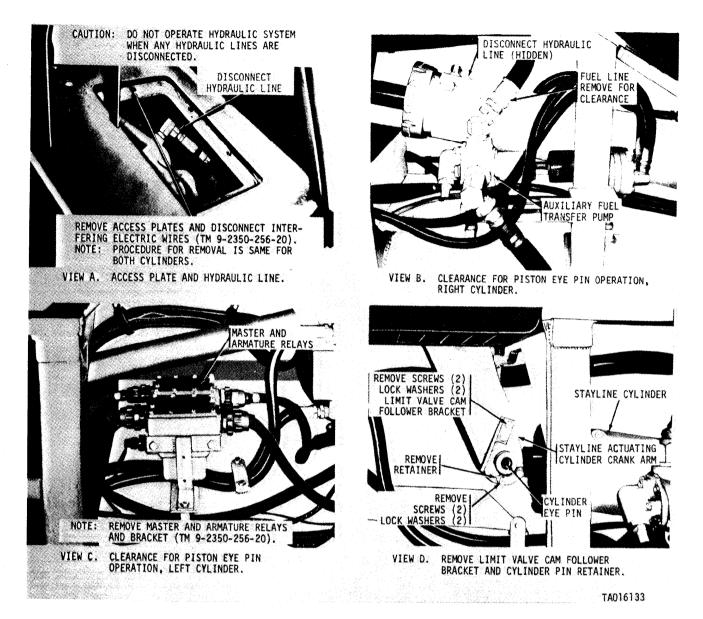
Boom stayline actuating cylinders — removal and installation (Sheet 1 of 2).
